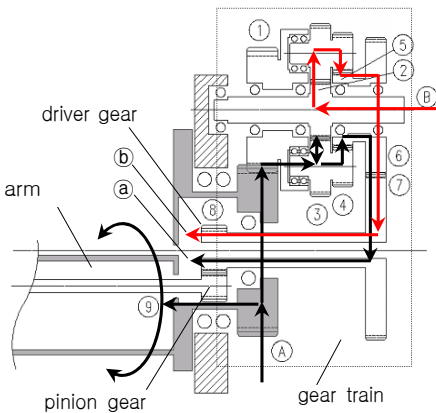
Power trains for parts in arm of CNC wire bending machine
